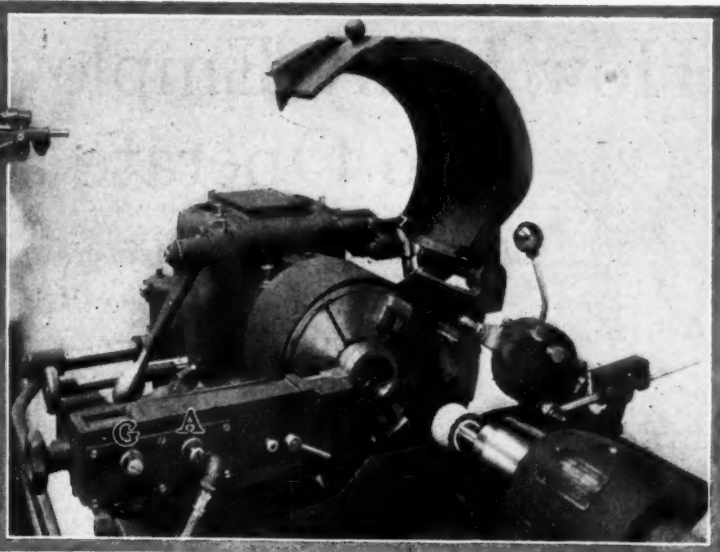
Close-up of working parts showing size indicator, dressing diamond and grinding wheel
